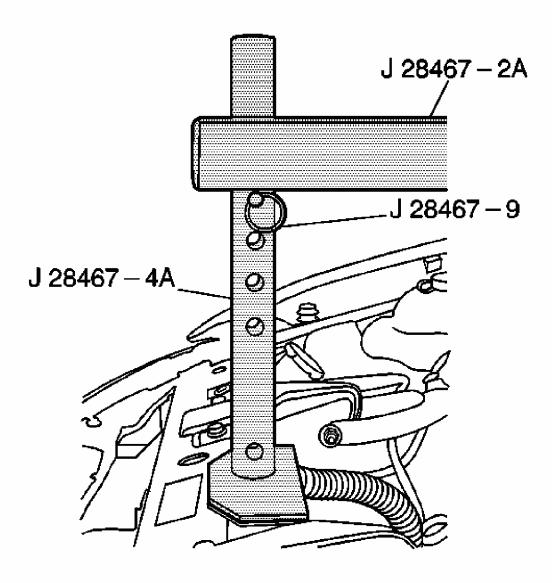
Installing Quick Release Pin J 28467-9 Courtesy of GENERAL MOTORS CORP.
